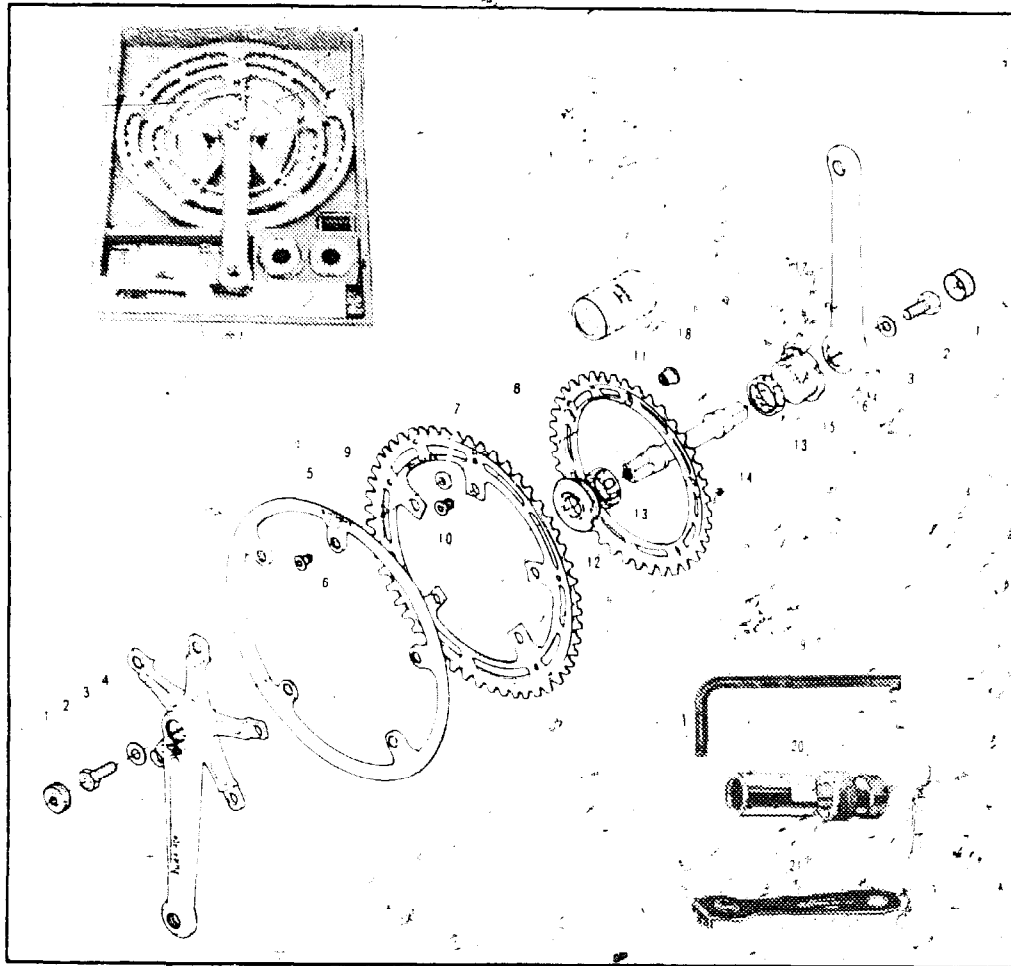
Shimano Duar-Ace Model GA-200 crank set. Parts are: (1) crank arm dust cap, (2) spindle bolt, (3) spindle washer, (4) right crank arm; (5) chain guard, (6) guard fixing bolt, (7) guard fixing spacer, (8 and 9) chainwheel, (10) chainwheel fixing bolt, (11) chainwheel fixing nut, (12) R.H. fixed cup, (13) steel ball retainer for bottom bracket, (14) bottom bracket spindle, (15) L.H. adjustable cup, (16) lock ring, (17) left crank arm, (18) dust seal, (19) hexagon wrench key, (20) cotterless crank extractor and (21) peg spanner.
